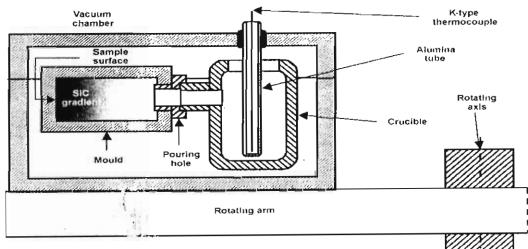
Schematic setup of the Centrifugal Casting for producing FGM Using Vacuum Chamber⁵.
